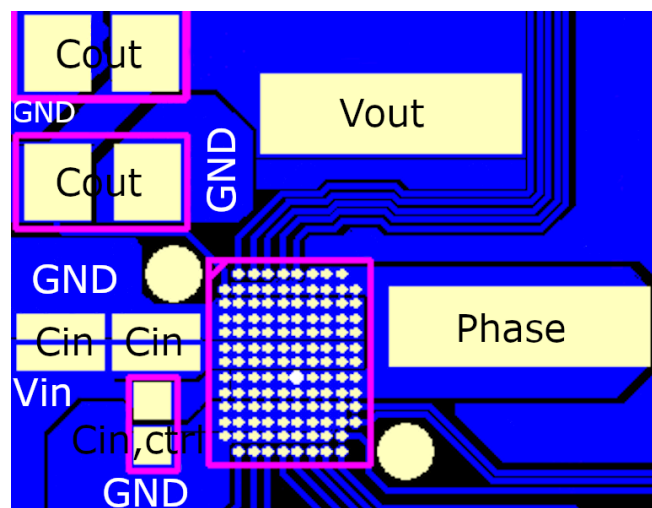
Top layer of the optimized PCB layout for bPOL2V5_V3.3.
